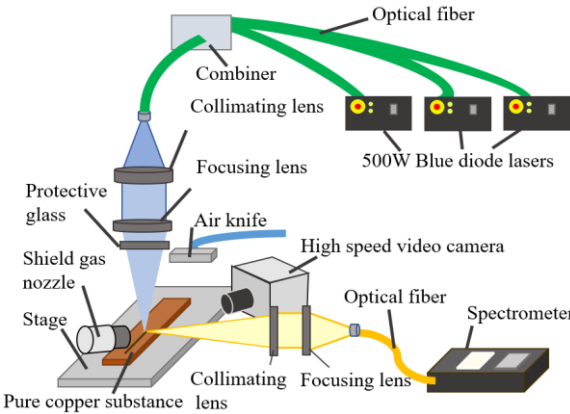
Schematic diagram of pure copper welding with 1.5 kW blue diode laser.
